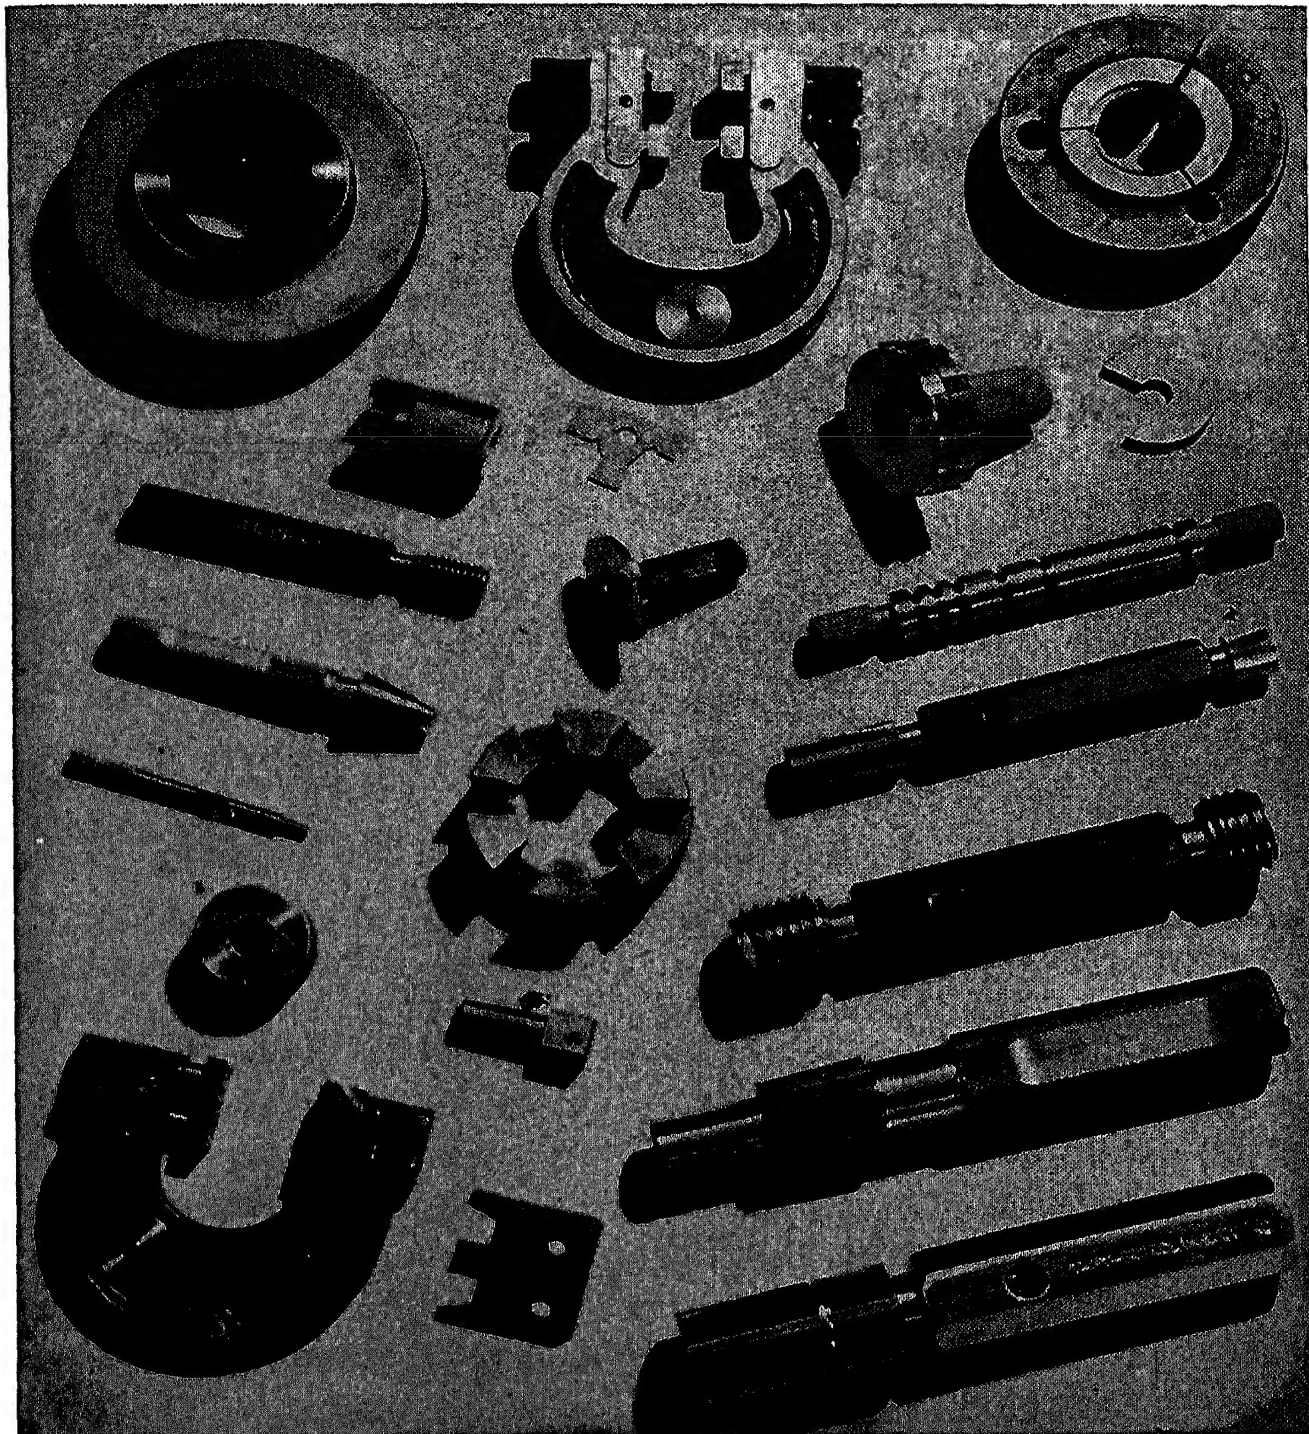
Typical gages. (Courtesy Taft Pierce Co., Woonsocket, R. I.)
